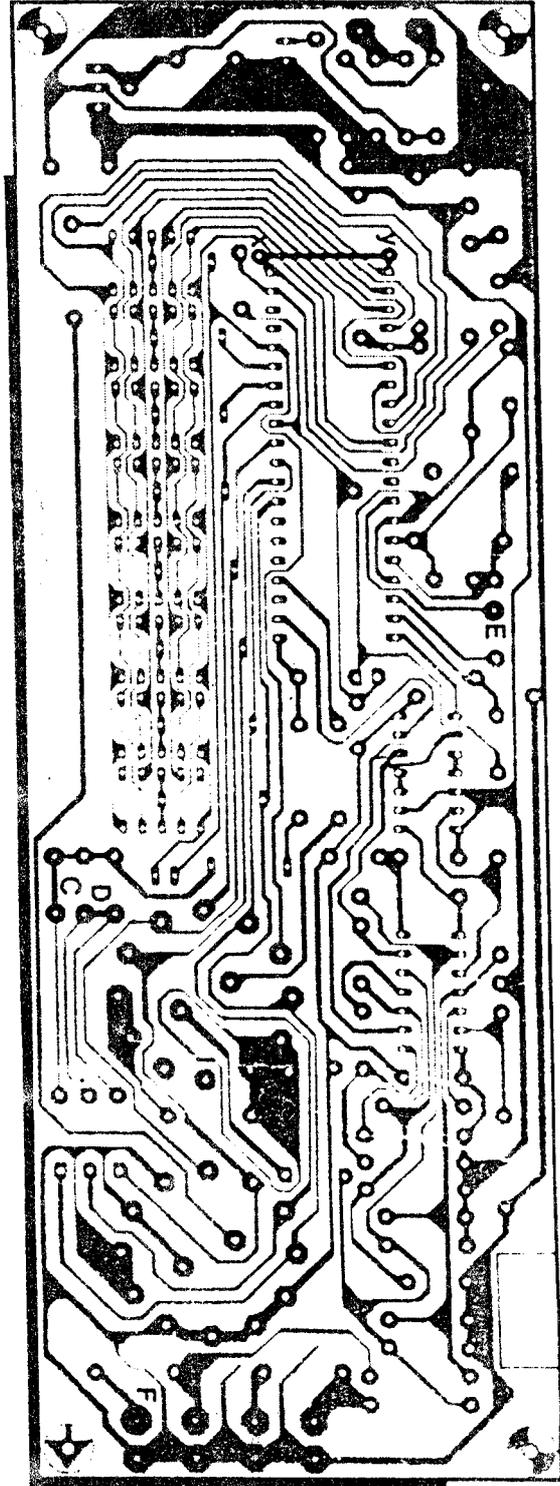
TRACK LAY-OUT OF THE PCB
